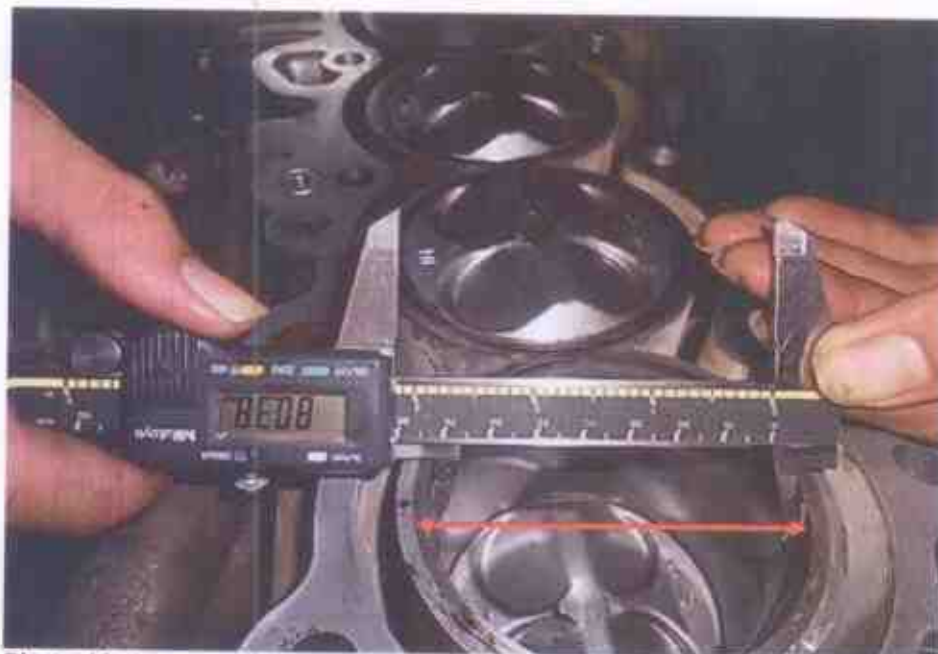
shows measurement being carried out to the bore (arrowed) of cylinder 4 of the Honda engine. The bore and stroke measurements of the Honda engine were carried out using a digital Vernier Caliper. The bore measurement of cylinder 4 was recorded to be 80.38mm.
